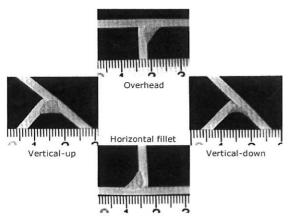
Cross-sectional weld profiles of DW-308LP (Wire size: 1.2 mmØ) with 304-type base metal (Plate thickness: 3 mm).
